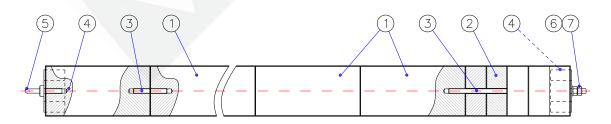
MARC-O60-01.05.00 [Counterweight assembly]
